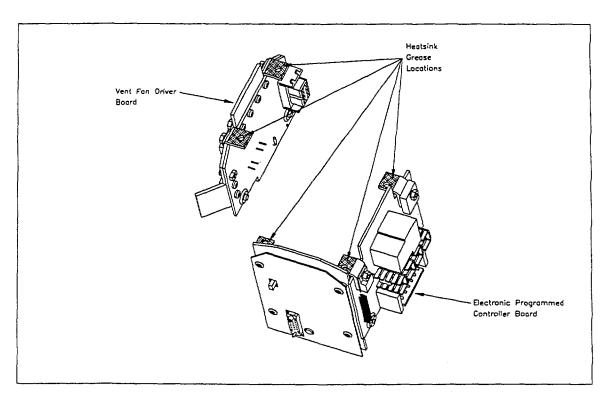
Detail, Circuit Board Brackets Requiring Heat-sink Compound
